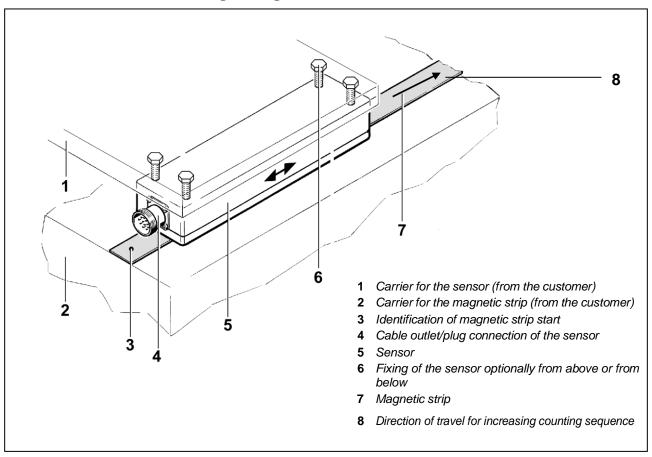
Mounting arrangement for sensor and magnetic strip
